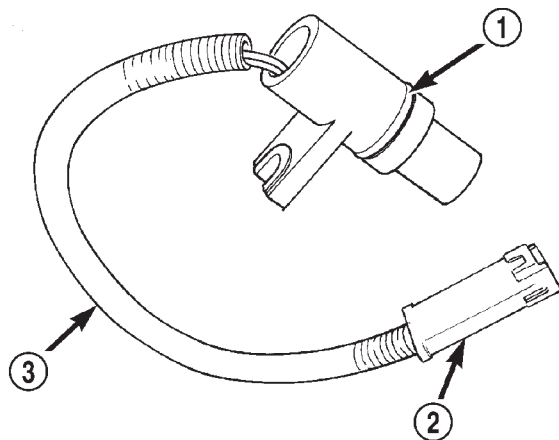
Sensor O-Ring—8.0L V-10 Engine
